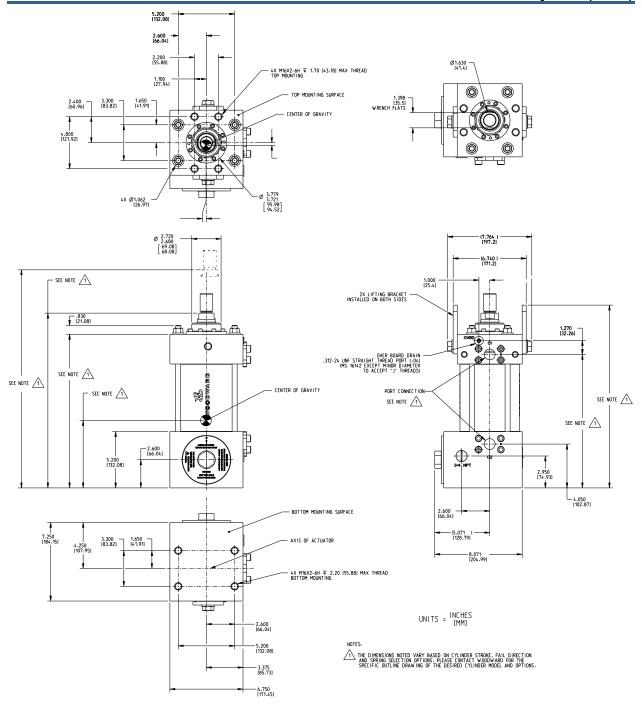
VSPC 5 inch bore, Installation Dimensions for Remote Cylinder
